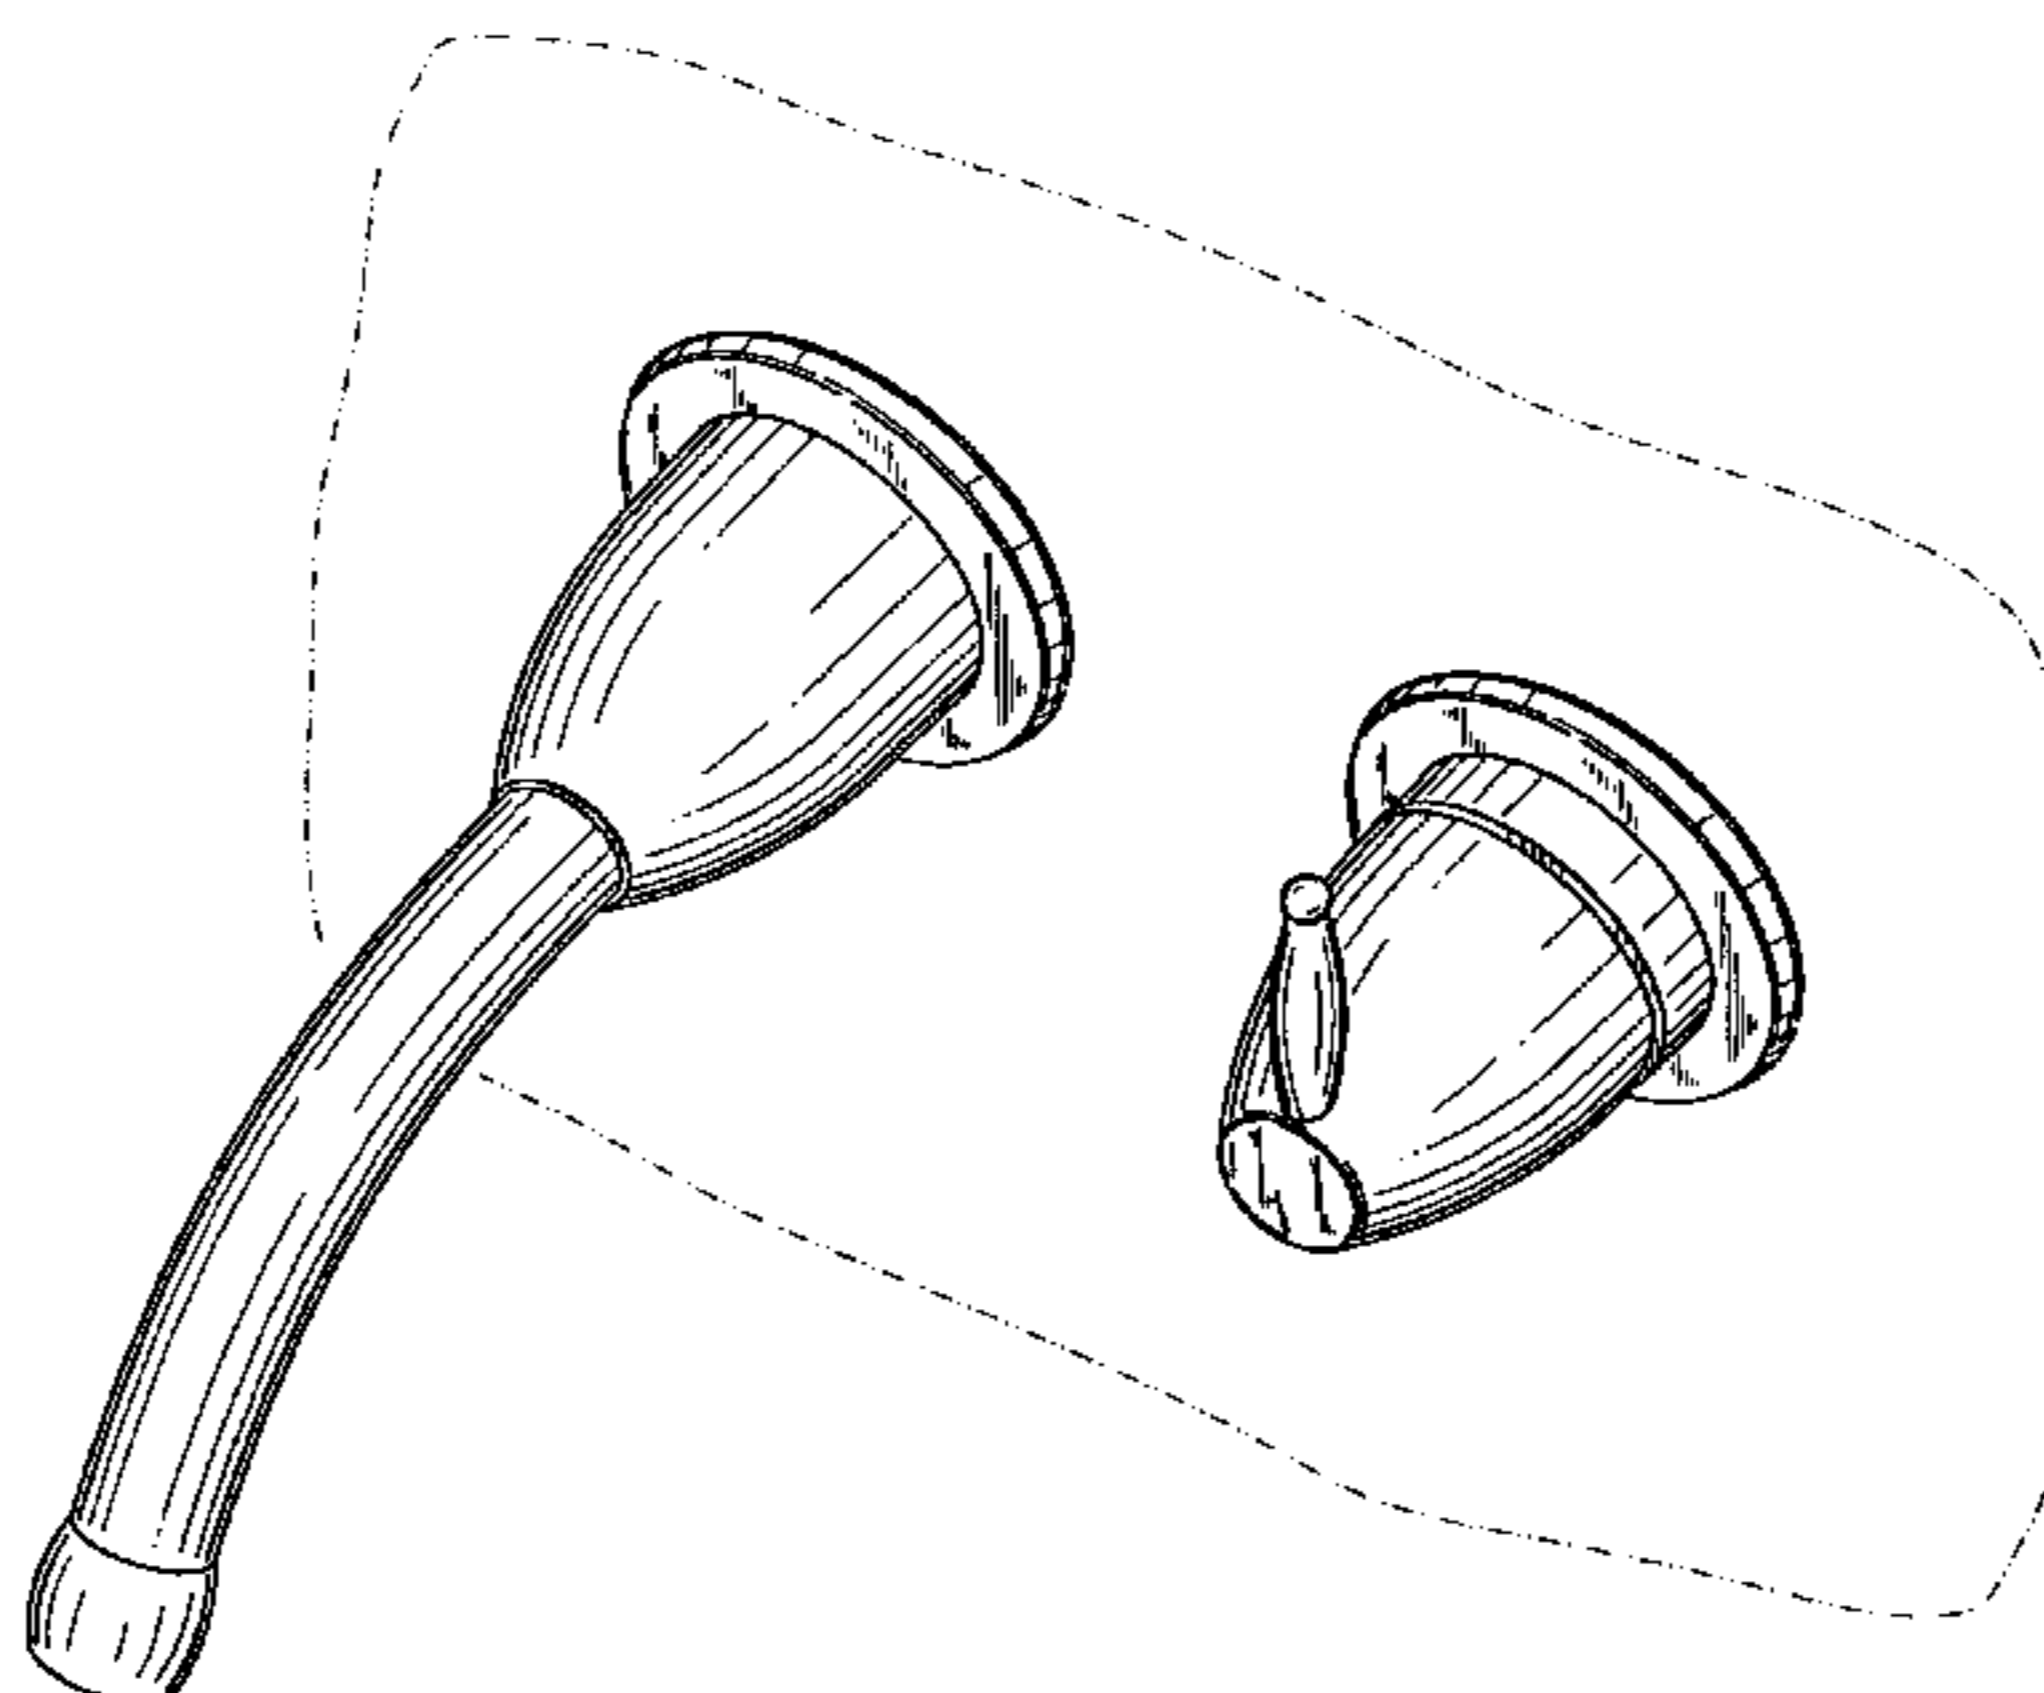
is a right, top, front perspective view of a combined spout and control handle embodying our new design;
